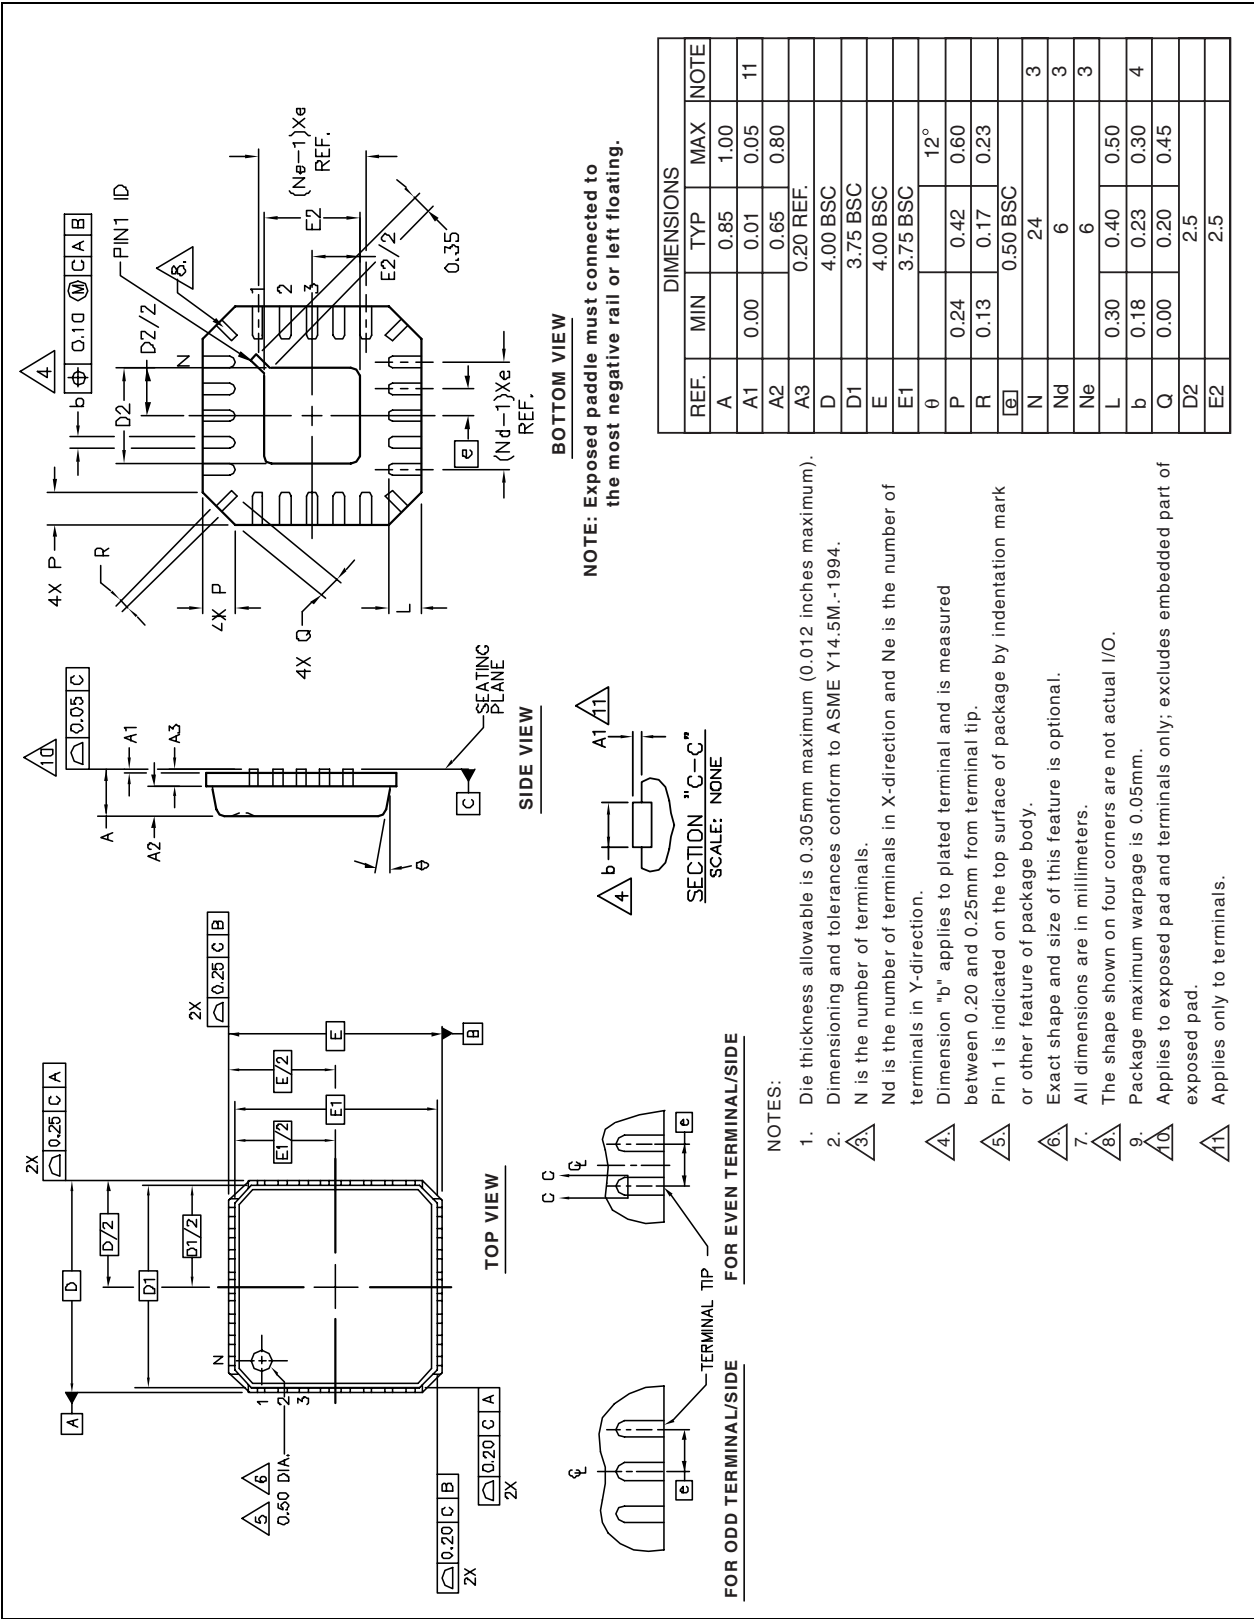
Package Drawing for 24-Pin QFP-N (YF)
